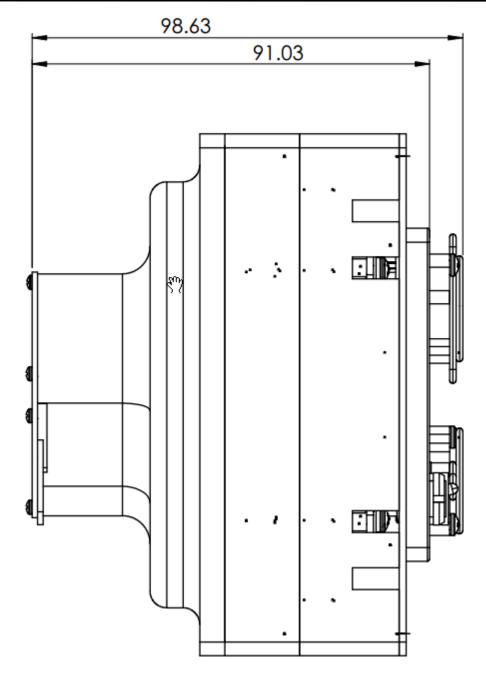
Camera Body with F Mount Lens Mount – Side View (Units in mm)
